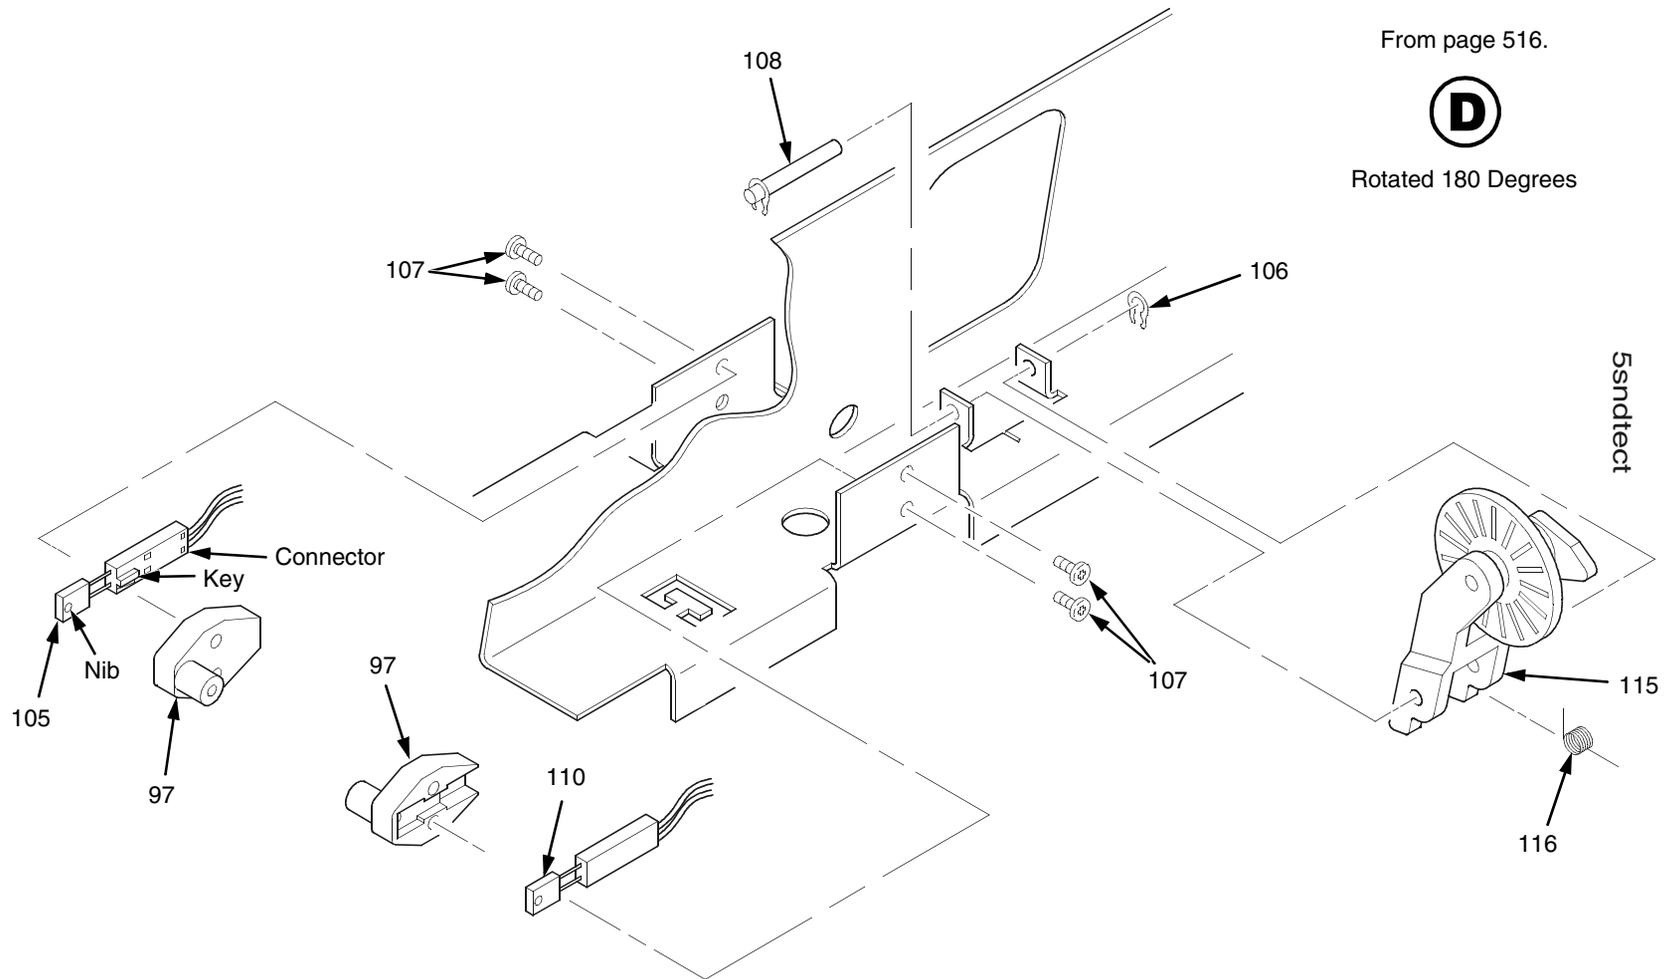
This illustrated parts breakdown is an exploded detail view of the paper motion detector.
